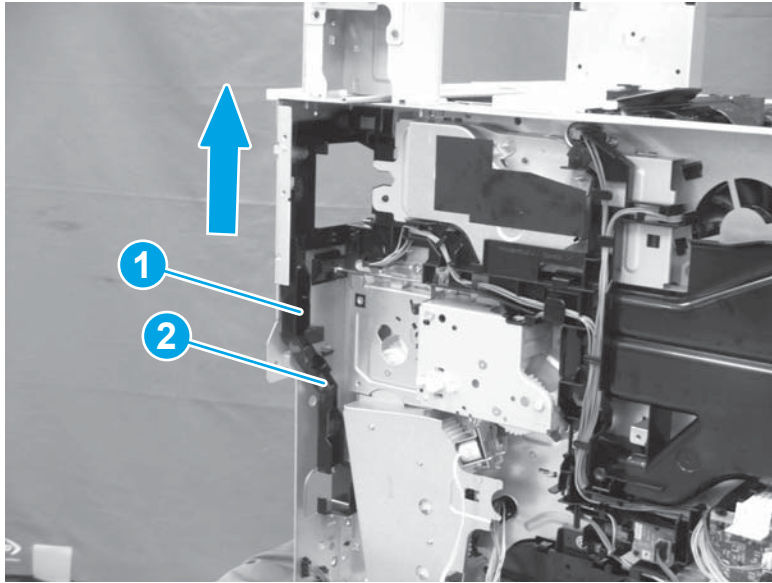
Release the cable and remove two screws and the inlet assembly
